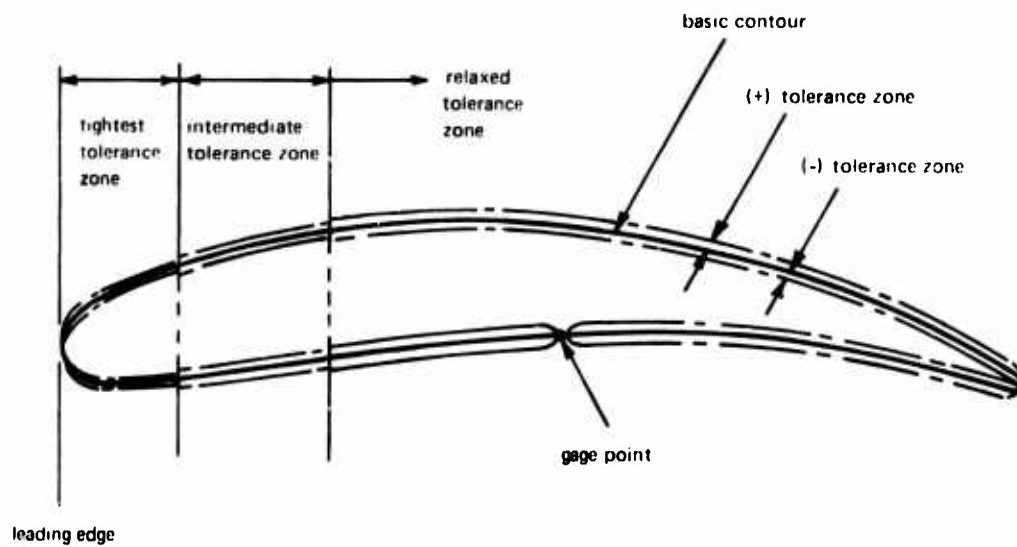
Schematic of Thickness Tolerance Zones for Pumpjet Blades.
